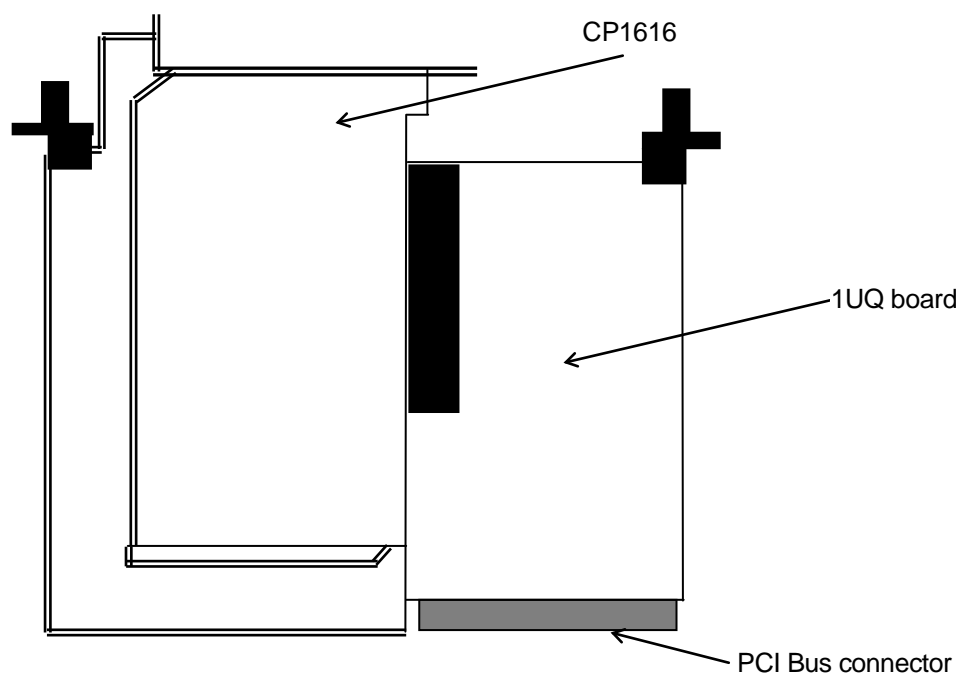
Outline view of interface board when CP1616 card and 1UQ board are connected (Top view)
